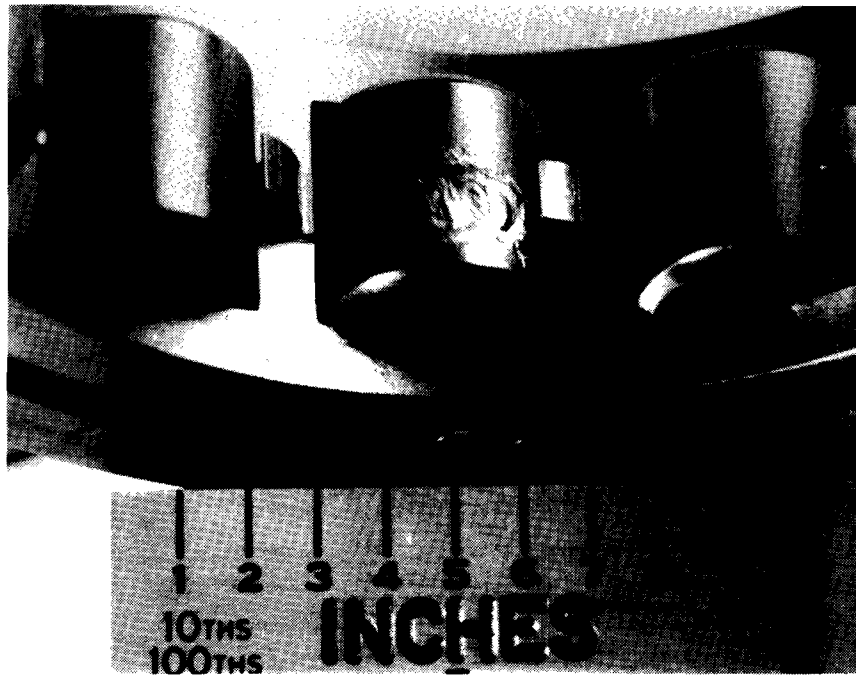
90-Degree Gearbox -466 Bearing Roller Defect C/D,
